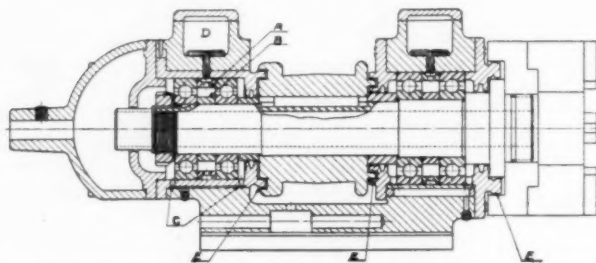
APPLICATION OF BALL BEARINGS TO WORK-HEAD SPINDLE OF GRINDING MACHINE
